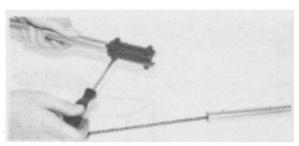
Loosen all four corners of Split Boom Coupling as to allow lower portion of Boom to be assembled.
